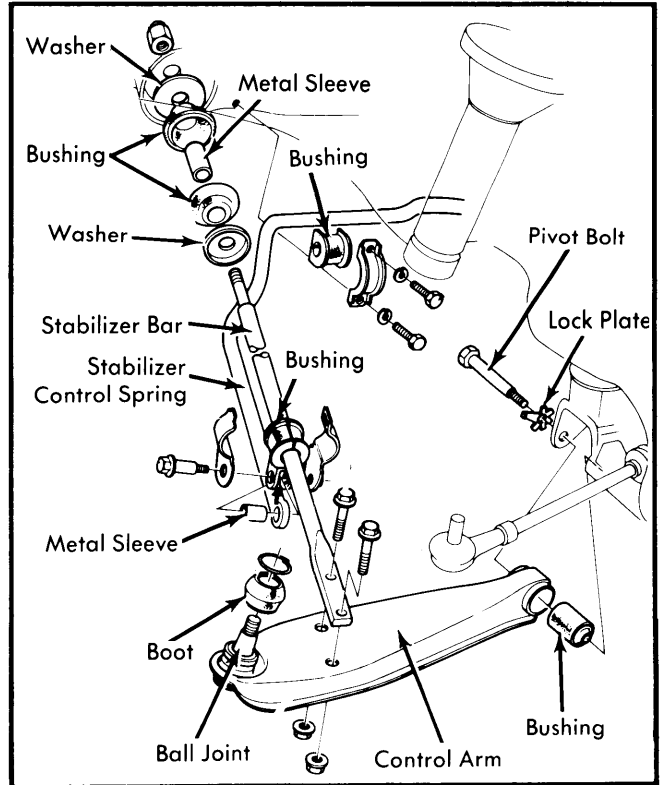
Exploded View Showing Stabilizer Bar and Control Spring (Sway Bar). Note Mounting Locations. Accord Model Shown
